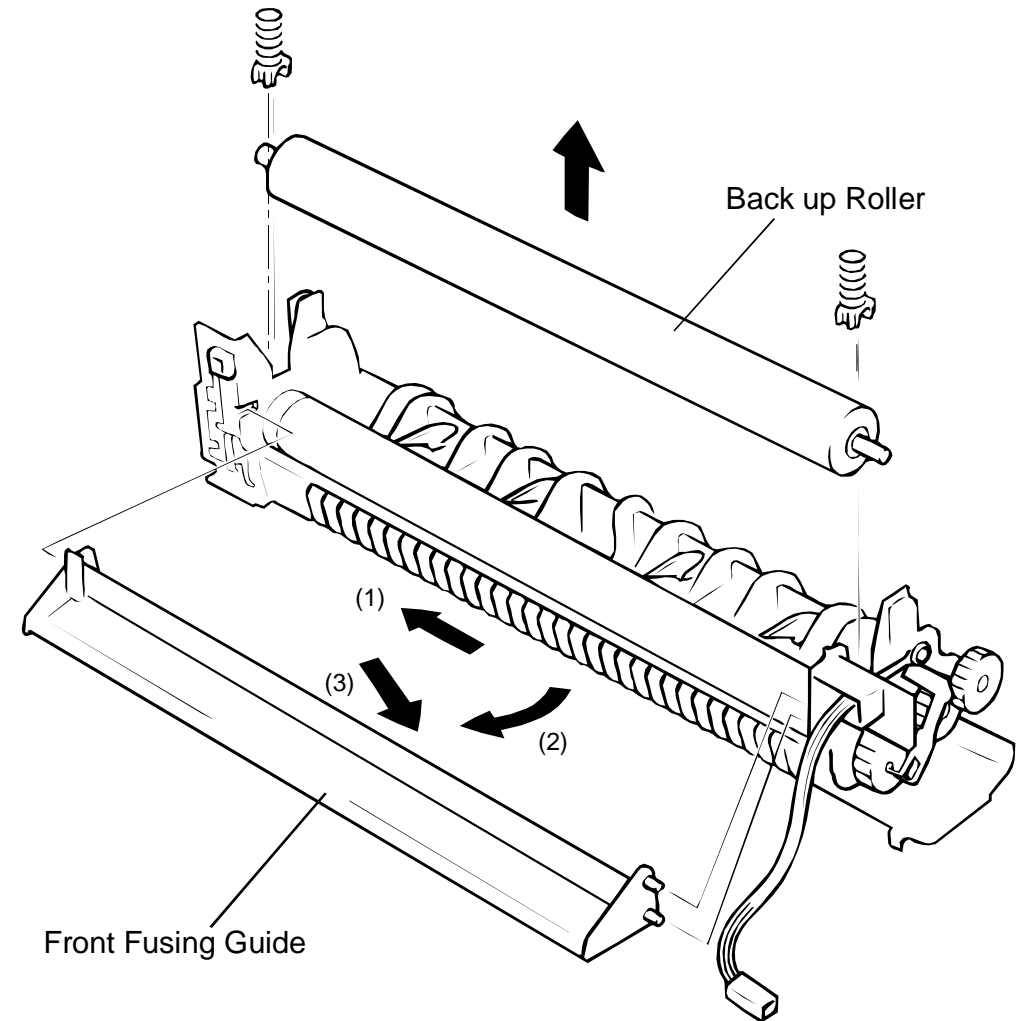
Backup Roller and Front Fusing Guide Removal
